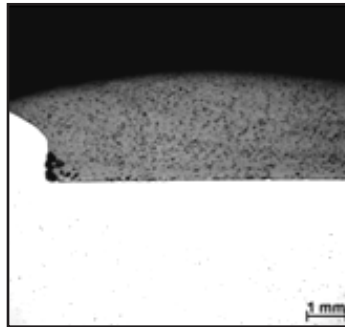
Macrosection of the overlay weld made using laser-powder surfacing – incomplete fusion and gas pores [2]
